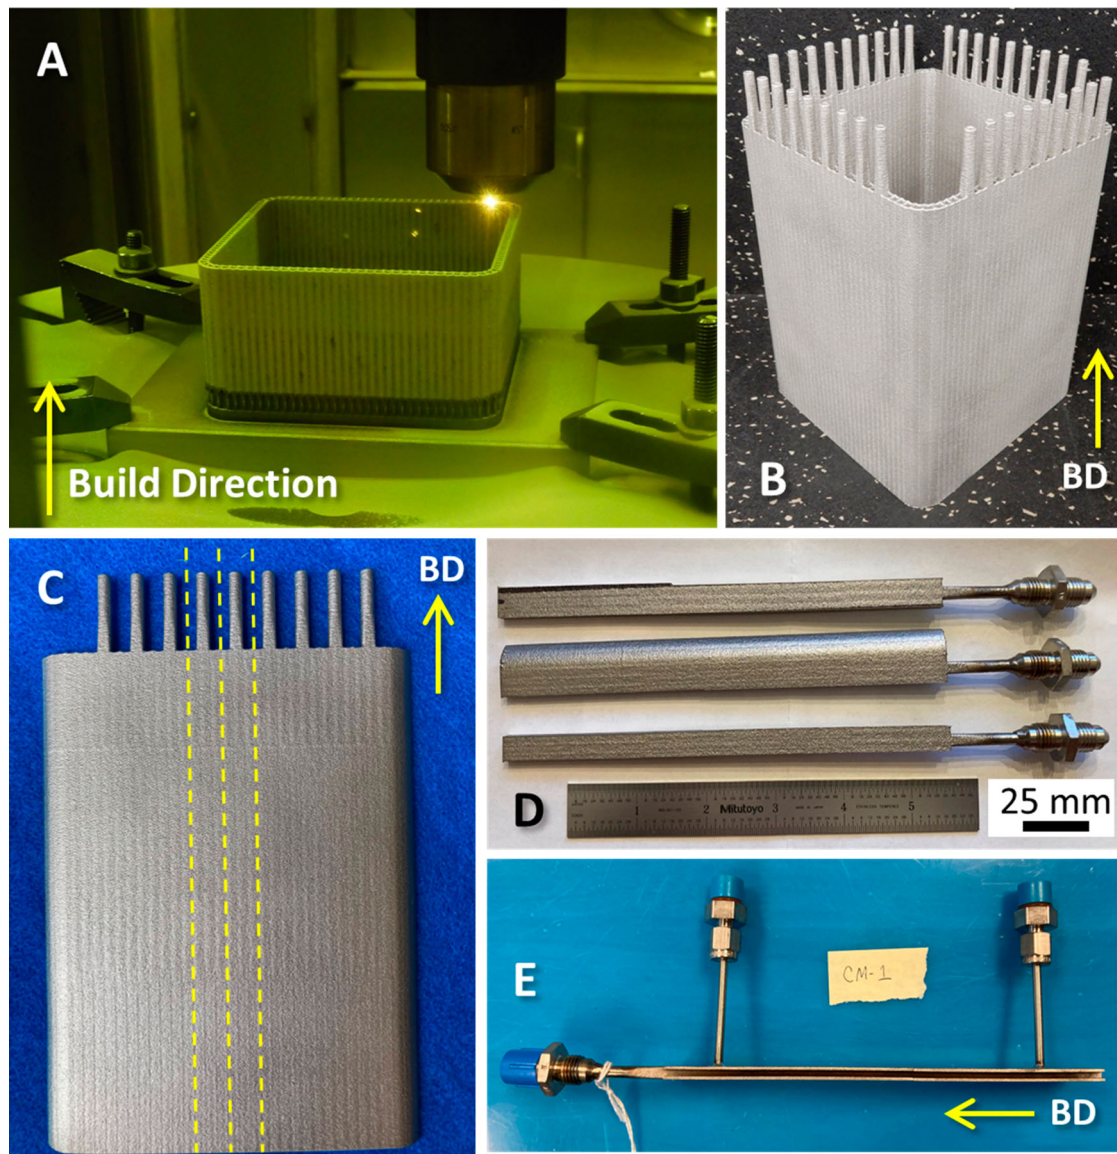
Channel specimen fabrication: (A) LP-DED of channel sample boxes, (B) complete NASA HR-1 box after stress relief and sectioning from the build plate, (C) Panels excised from boxes, (D) Individual channel samples with welded inlet port, and (E) drilled and welded instrumentation ports. Build Direction (BD) shown with arrow.
